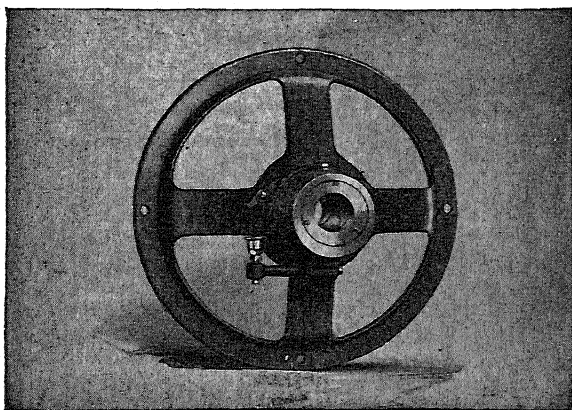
Reliance motor construction 7.* Back bearing bracket containing self-closing oil hole cover, large oil overflow cup, and pocket under the oil well for sediment.
